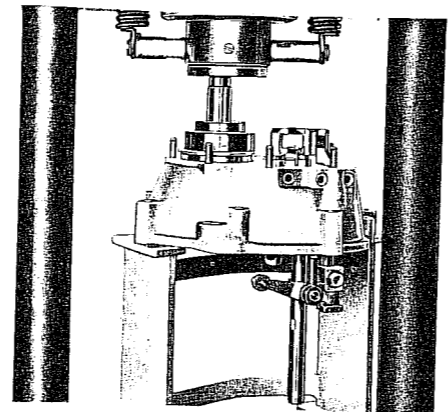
Installing the main drive shaft bearing in the gear carrier.
